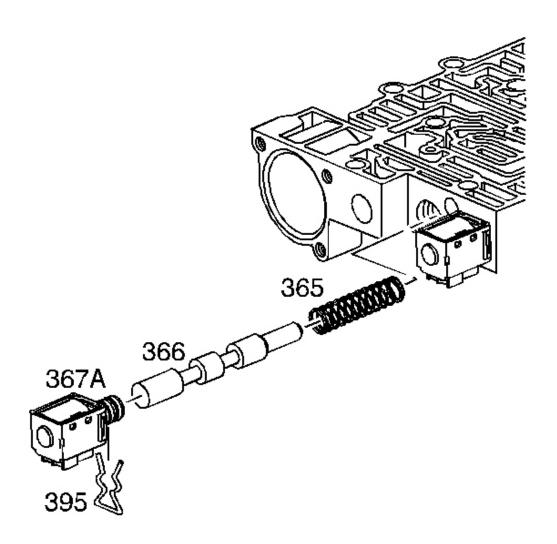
View Of 1-2 Shift Solenoid & Retainer Courtesy of GENERAL MOTORS CORP.
